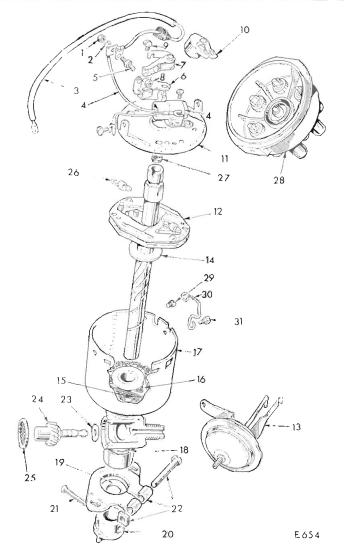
Exploded arrangement of Vitesse distributor (A.C. Delco Type D202)
